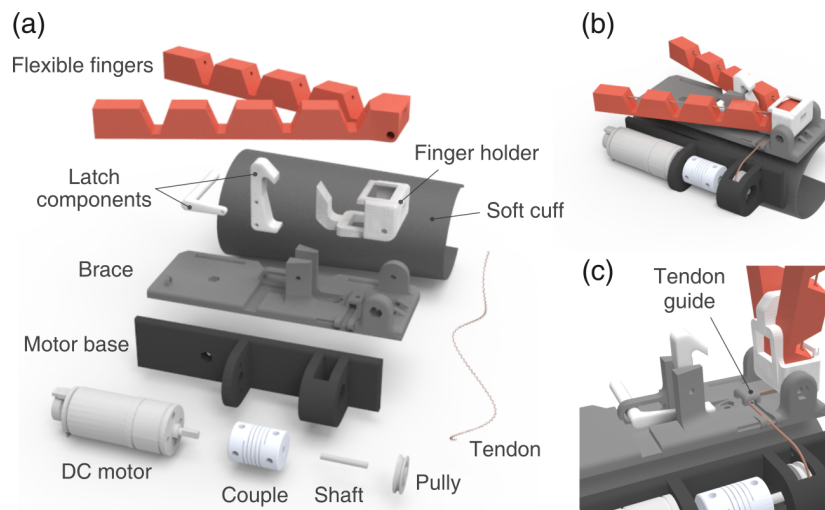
CAD images of the Dorsal Grasper: (a) exploded, (b) assembled, and (c) tendon routing details.
